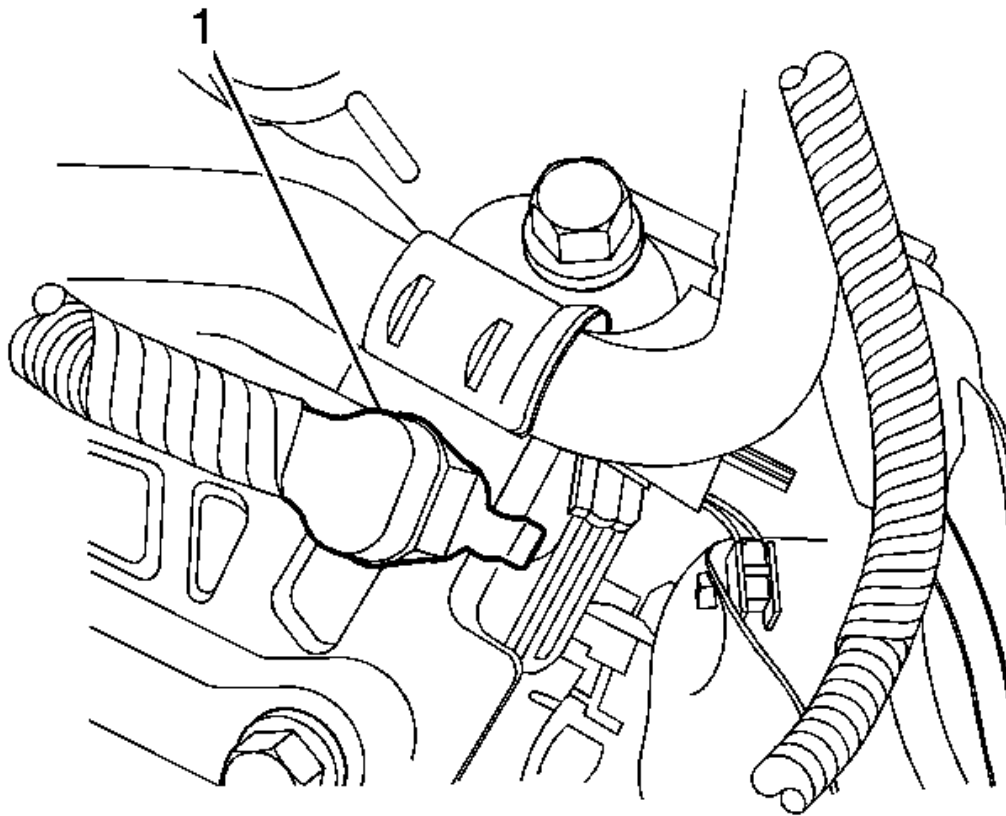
Locating Engine Block Heater Element Retaining Clip
